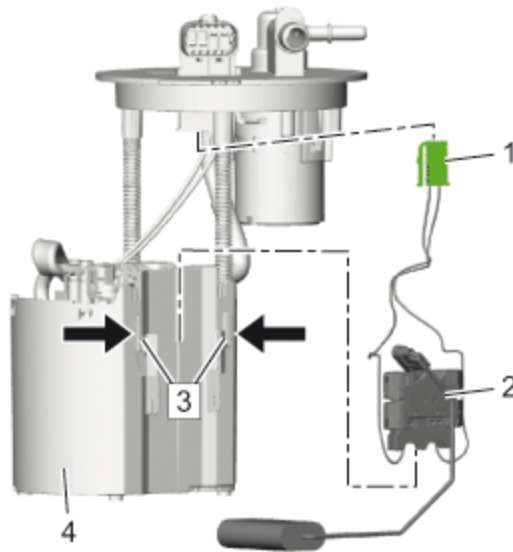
Fuel Level Sensor, Fuel Pump Module, Retaining Brackets And Electrical Connector
